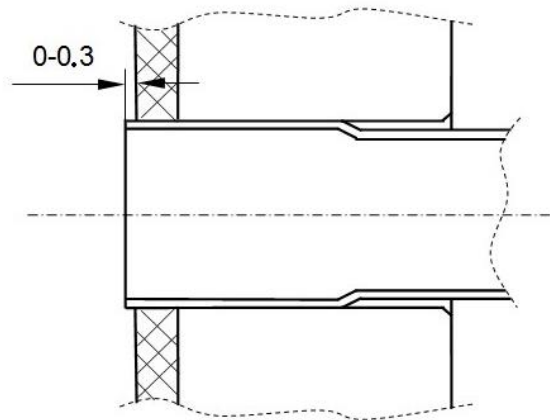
Diagram of a properly prepared tube for the welding process
